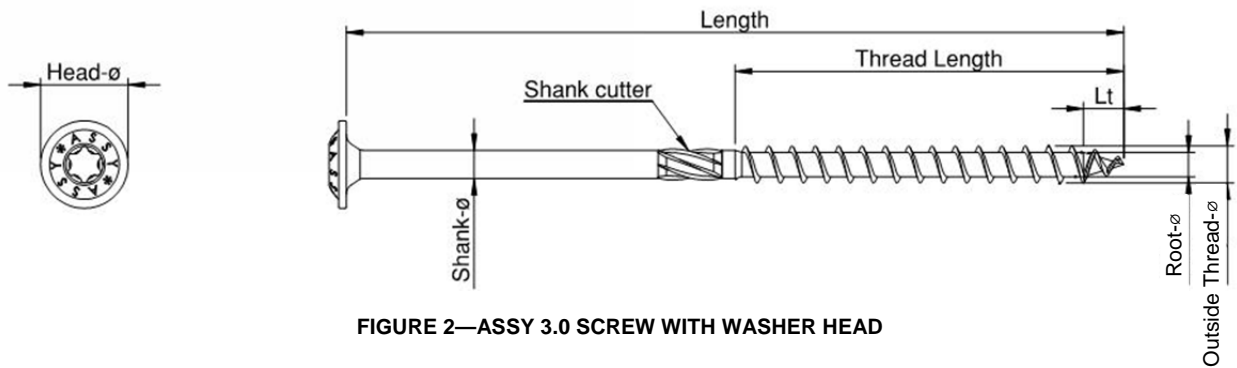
ASSY 3.0 SCREW WITH WASHER HEAD
